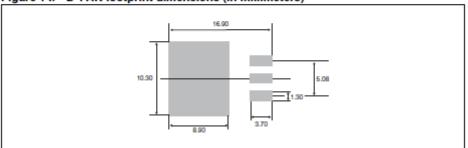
D<sup>2</sup>PAK footprint dimensions (in millimeters)
